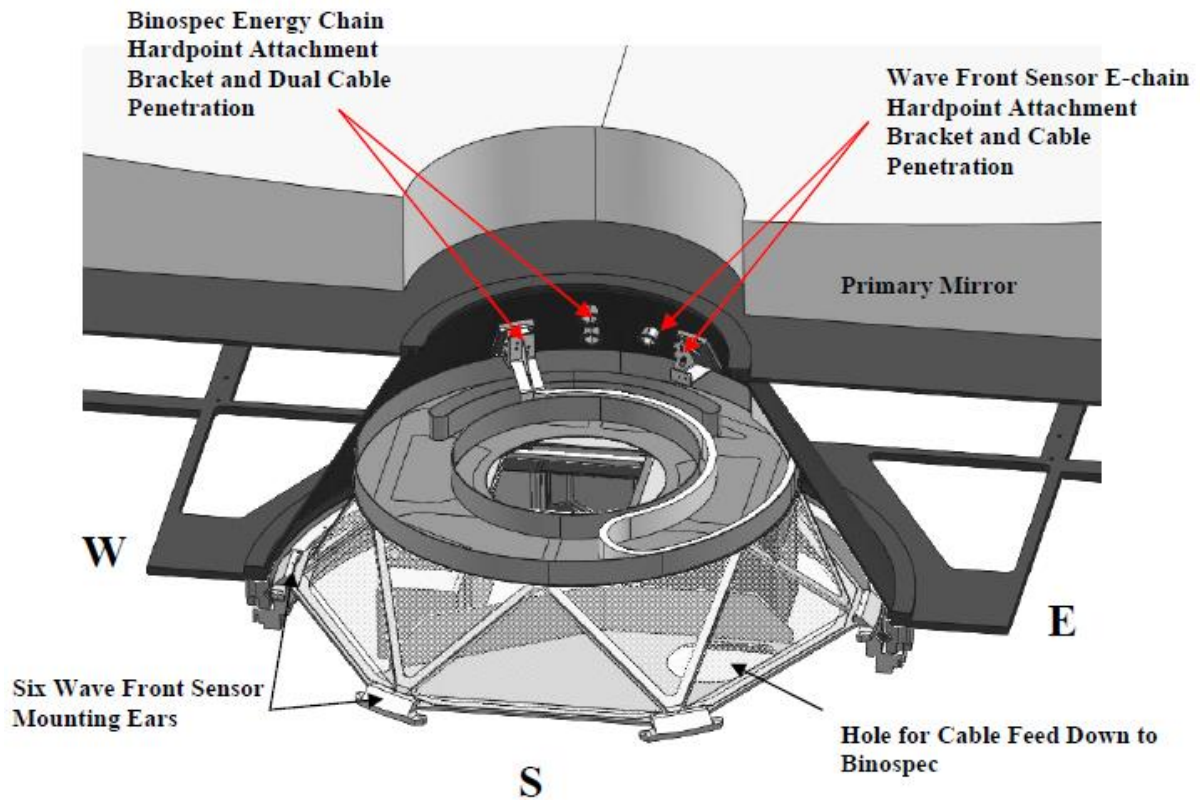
Calibration / derotator assembly mounted into primary mirror cell
